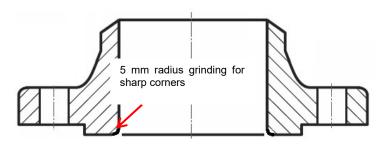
Flange sharp corners shall be ground to 5 mm minimum radius.
